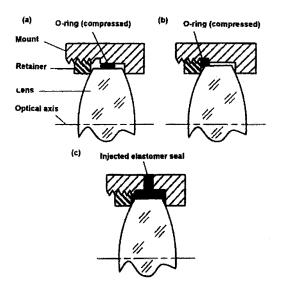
Three techniques for statically sealing a lens into its mount: (a) an O-ring around the lens rim, (b) an O-ring between the retainer, cell, and lens corner, and (c) An injected (formed-in-place) elastomeric seal.
